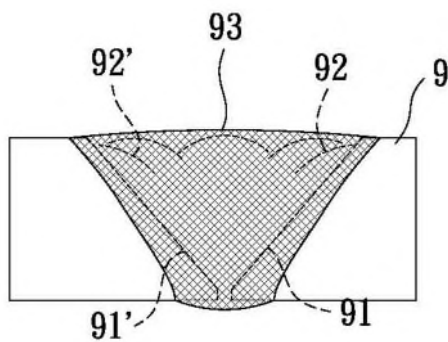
Depicts a cross-sectional view of a weld formed between the two jointed workpieces.
